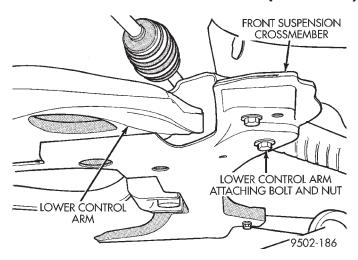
Lower Control Arm Attachment To Front Suspension Crossmember
